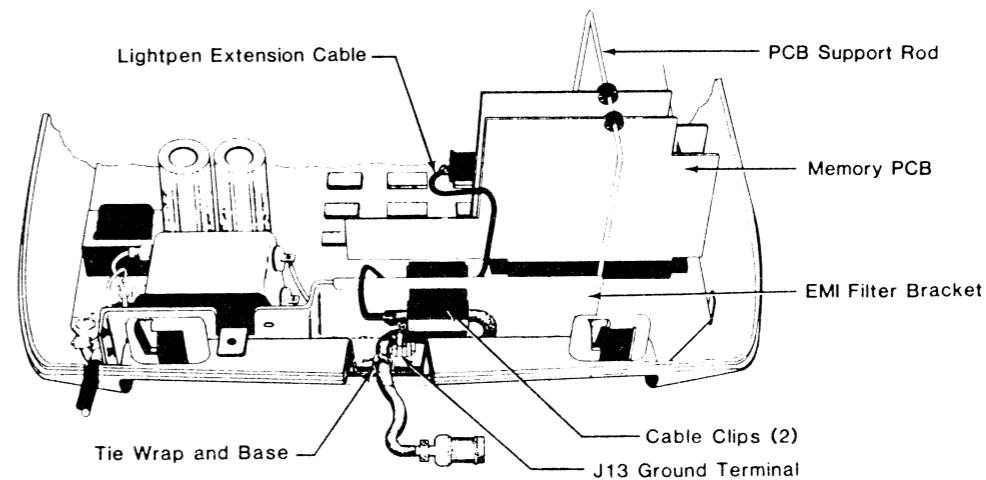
INSTALLED LIGHTPEN EXTENSION CABLE (VIEWED FROM REAR OF DISPLAY UNIT HOUSING)
